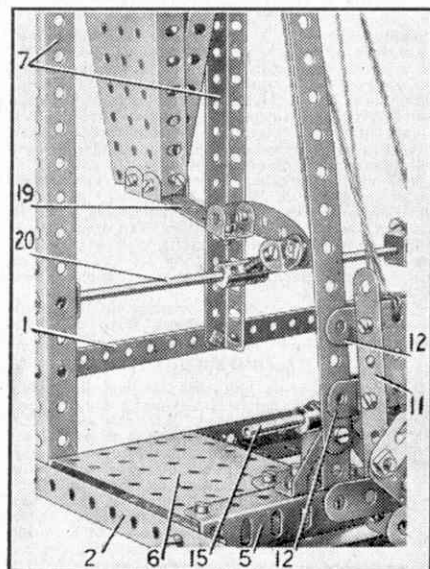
A close-up view of the hopper discharging gear and control mechanism.
